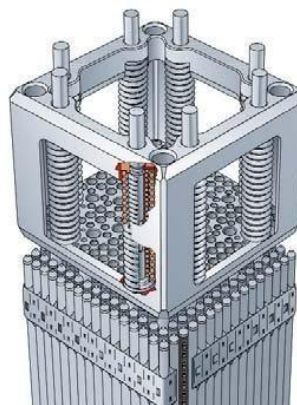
Typical Holddown springs used for German-type PWR [11].
